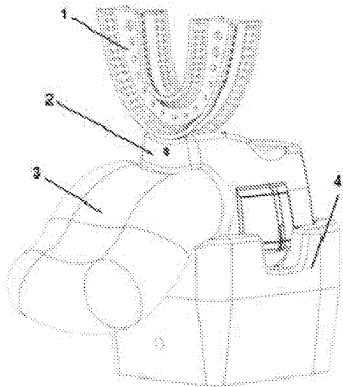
Drawing of patent WO2019103701A1 Automatic Tooth Cleaning Device
